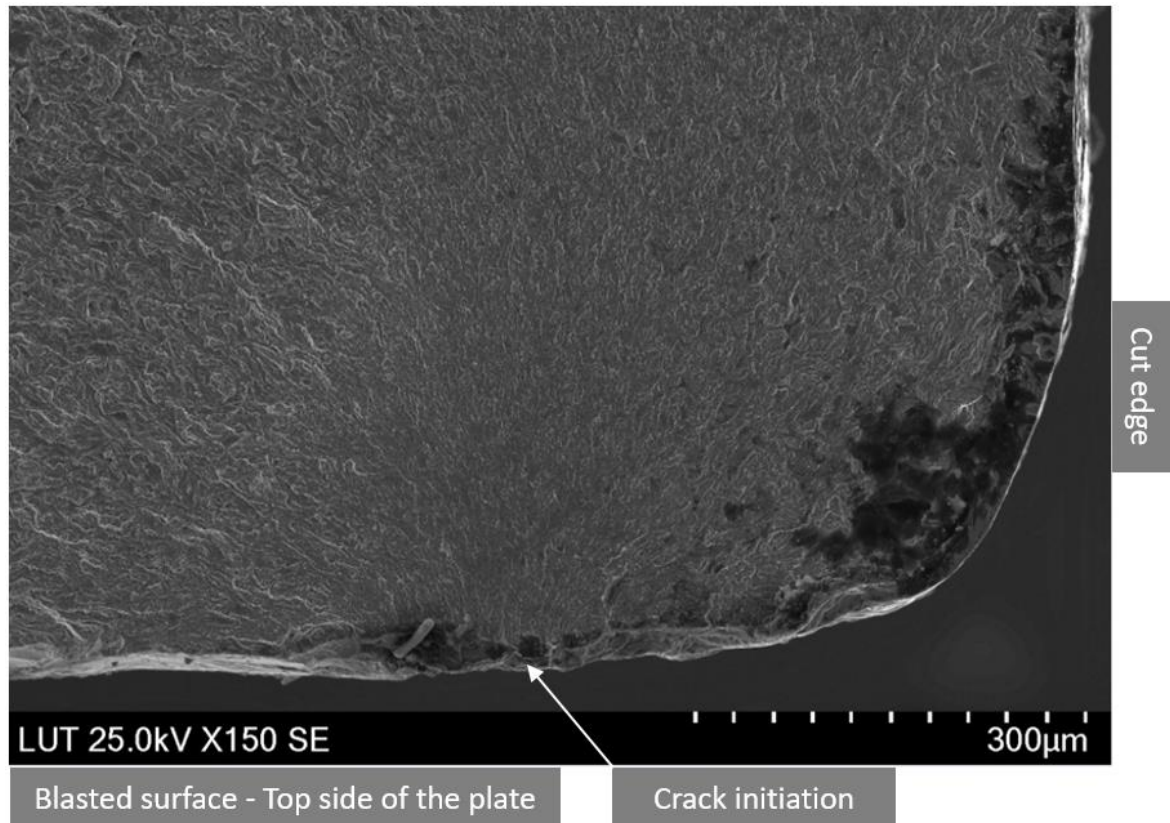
Top corner of fracture surface from LC1-2 specimen.
